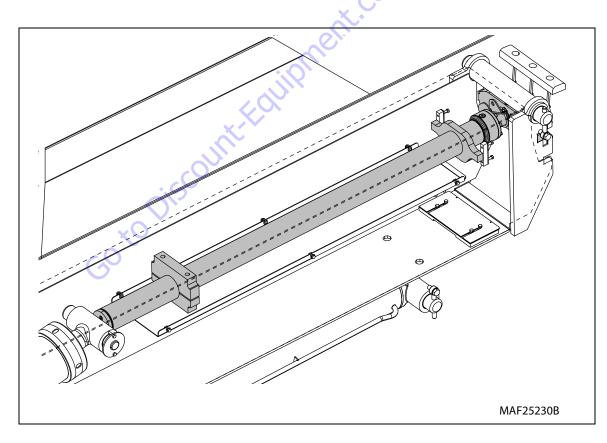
Removal/Installation of Tower Telescope Cylinder
